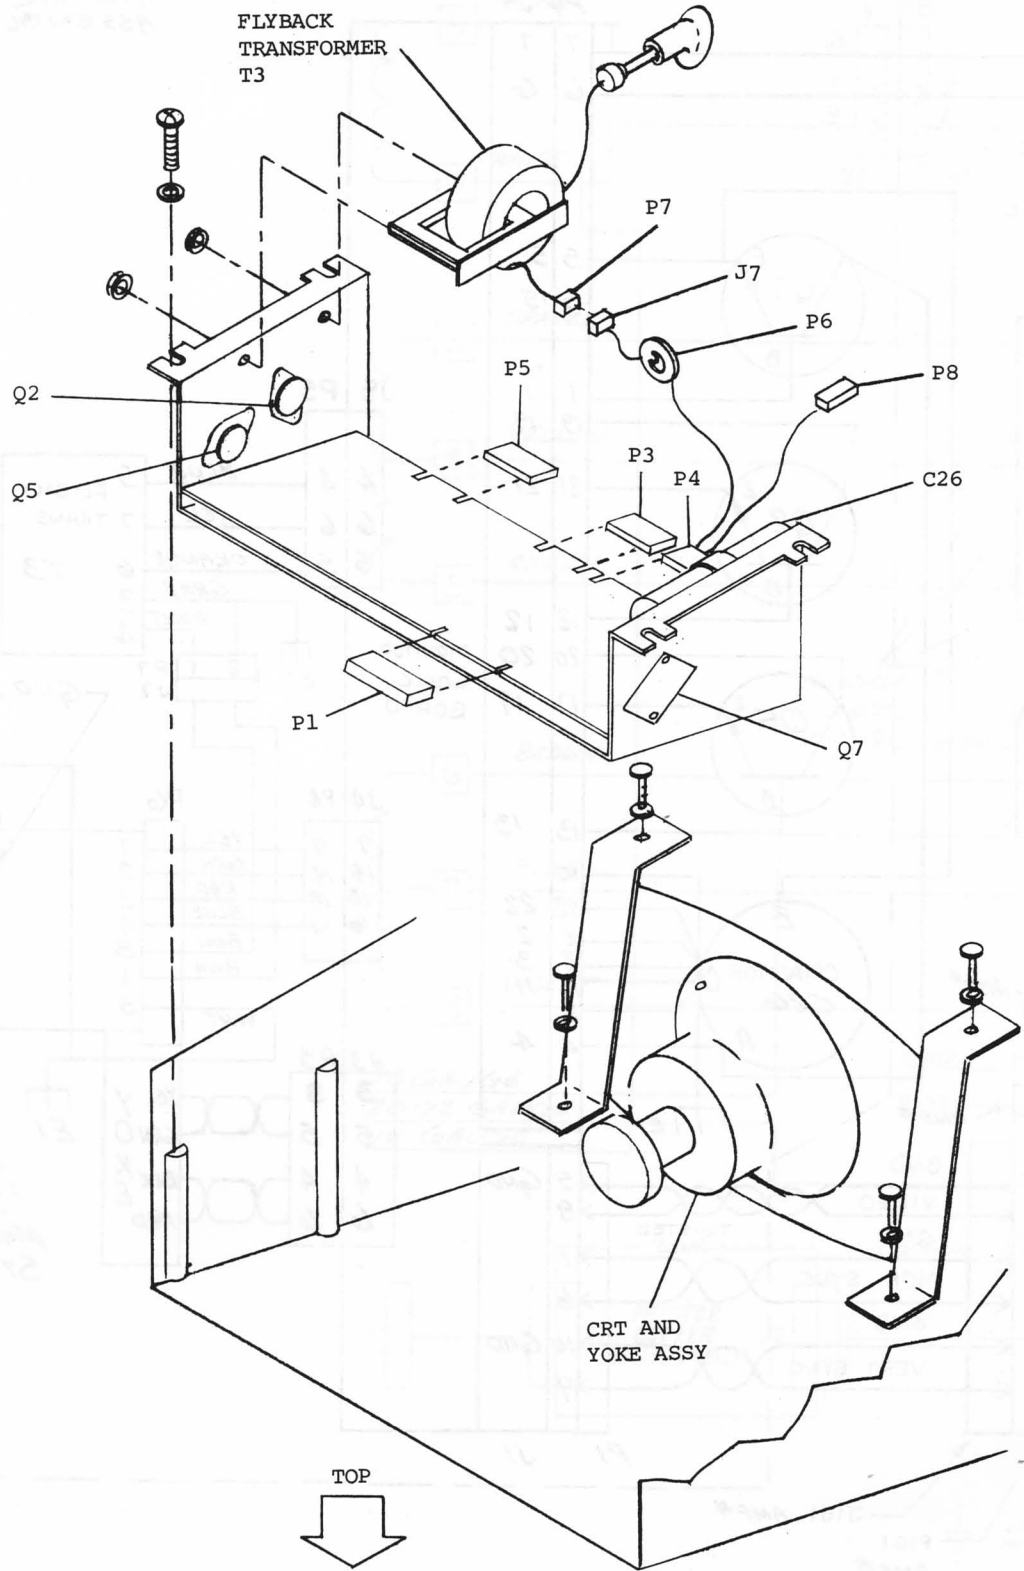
Terminal, Exploded View (Sheet 1 of 5)
